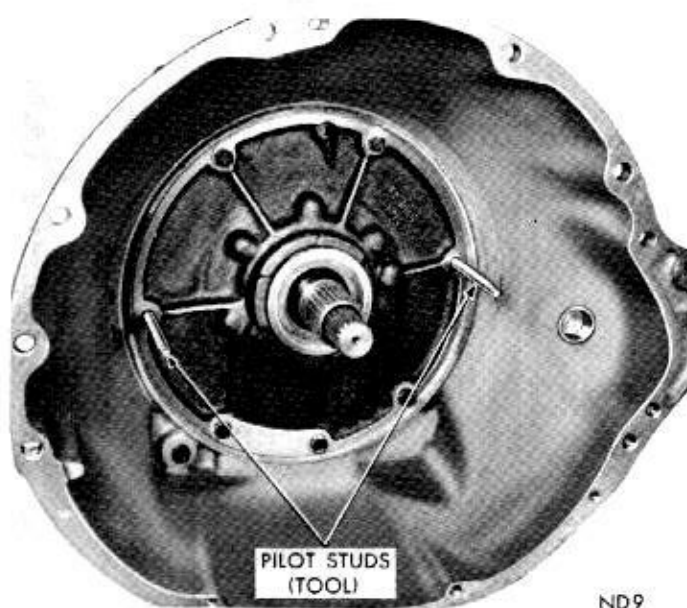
Installing Pump and Reaction Shaft Support Assembly
